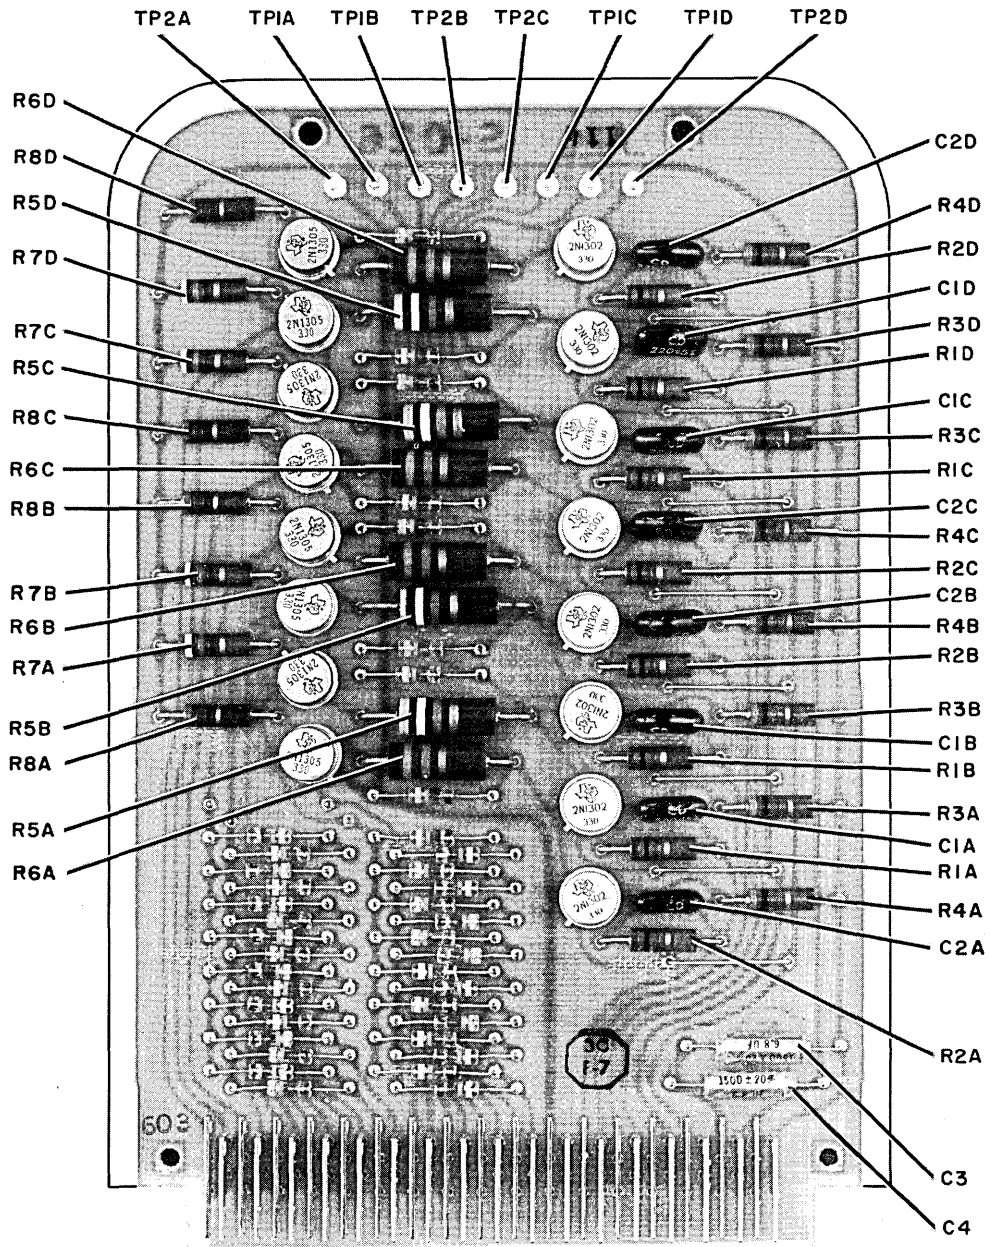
Selection Switch PAC, Model SS-32, Parts Location (Resistors, Capacitors and Test Points)
